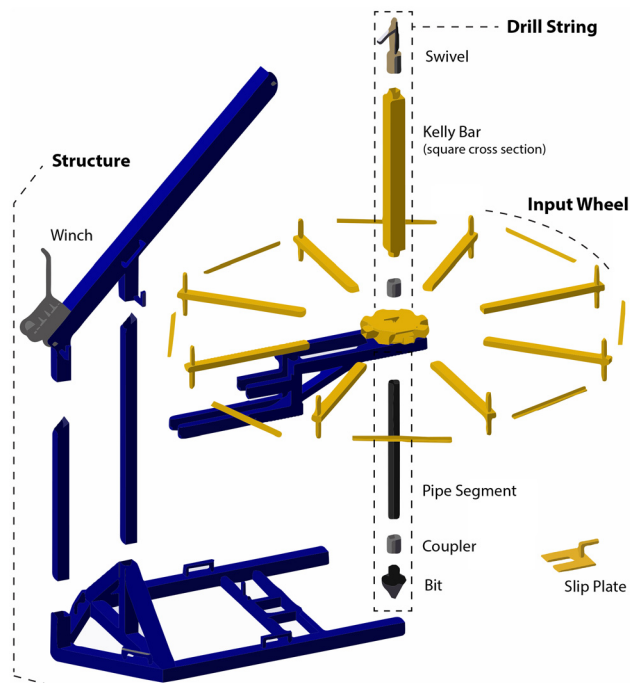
The major subsystems and parts of the Village Drill. The structure divides into five parts; the base, the boom, the wheel support, and two vertically oriented beams to give the boom height. The input wheel has a center hub (welded) with eight spokes that extend from it and are secured by eight cross members. The drill string includes the swivel, Kelly bar, and many short (meter-long) pipe segments and couplers that are added to the drill string as the borehole deepens. The Village Drill disassembles into the pieces shown for transport to and from the job site.
